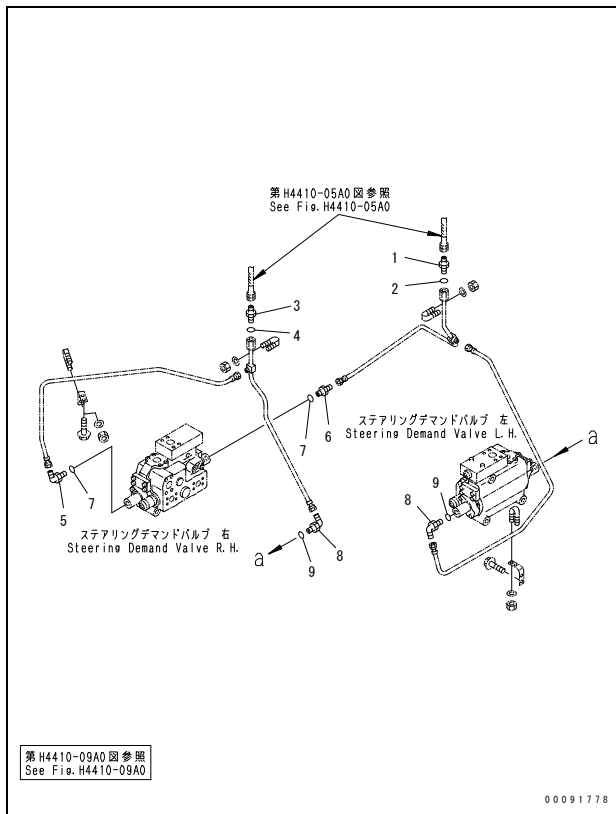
F0050 (STEERING VALVE MOUNTING PARTS)
